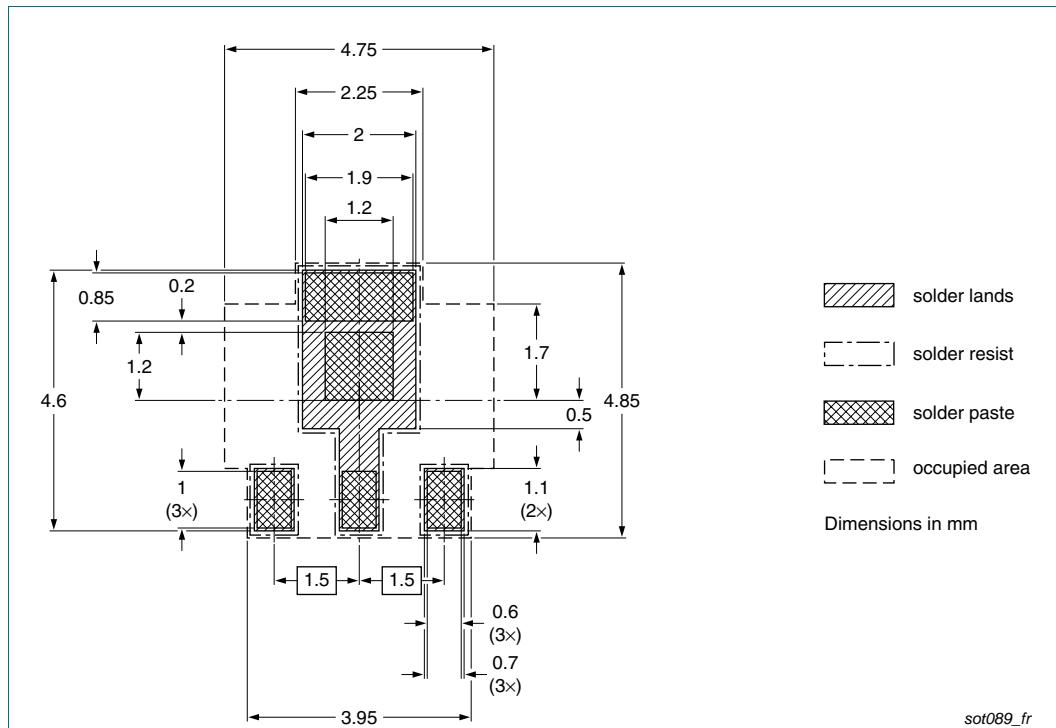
Reflow soldering footprint SOT89 (SC-62)
